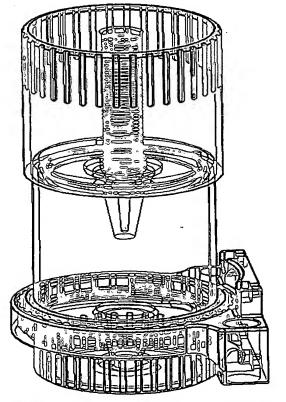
• Dispenser in fill position • nozzle section in bracket · P6 nozzle cap attached
